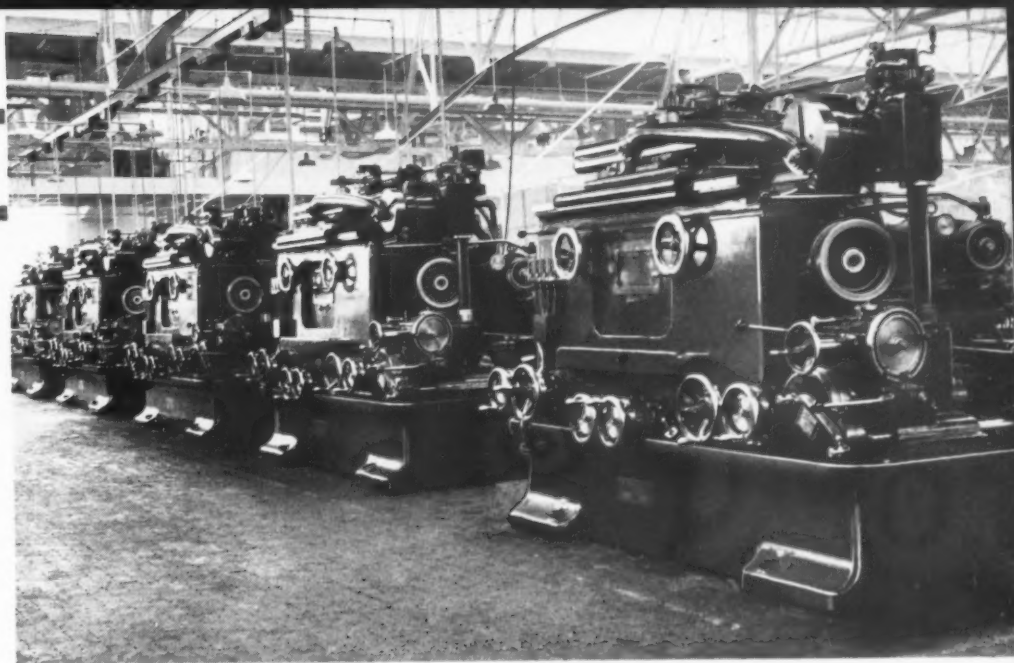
(Right) Battery of Five Lees-Bradner Machines Used for Grinding Teeth of Gears for P & W Engines
